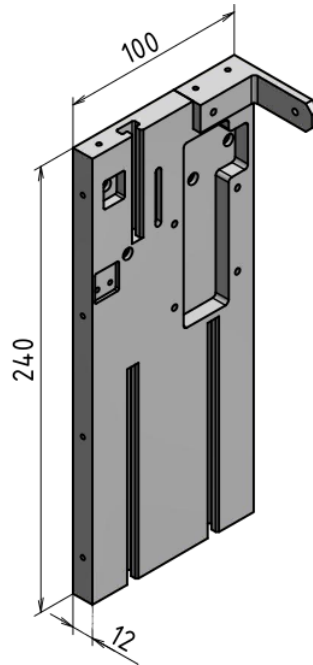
Base plate of the LIBS module. Essential dimensions are marked.
